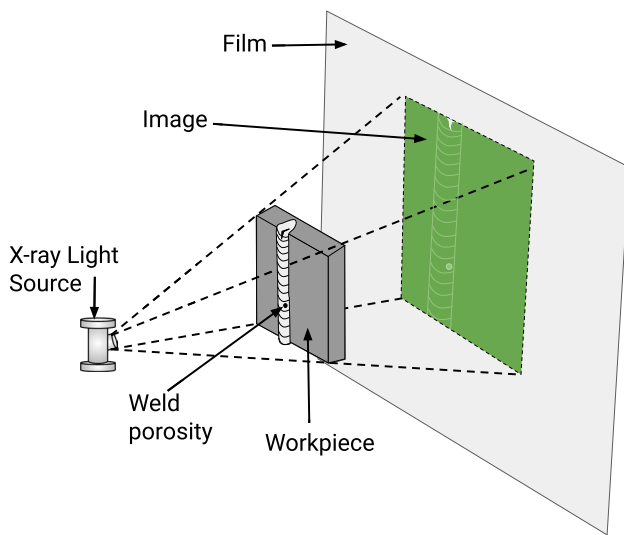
Schematic representation of experimental setup for recording radiographic images of weld bead
